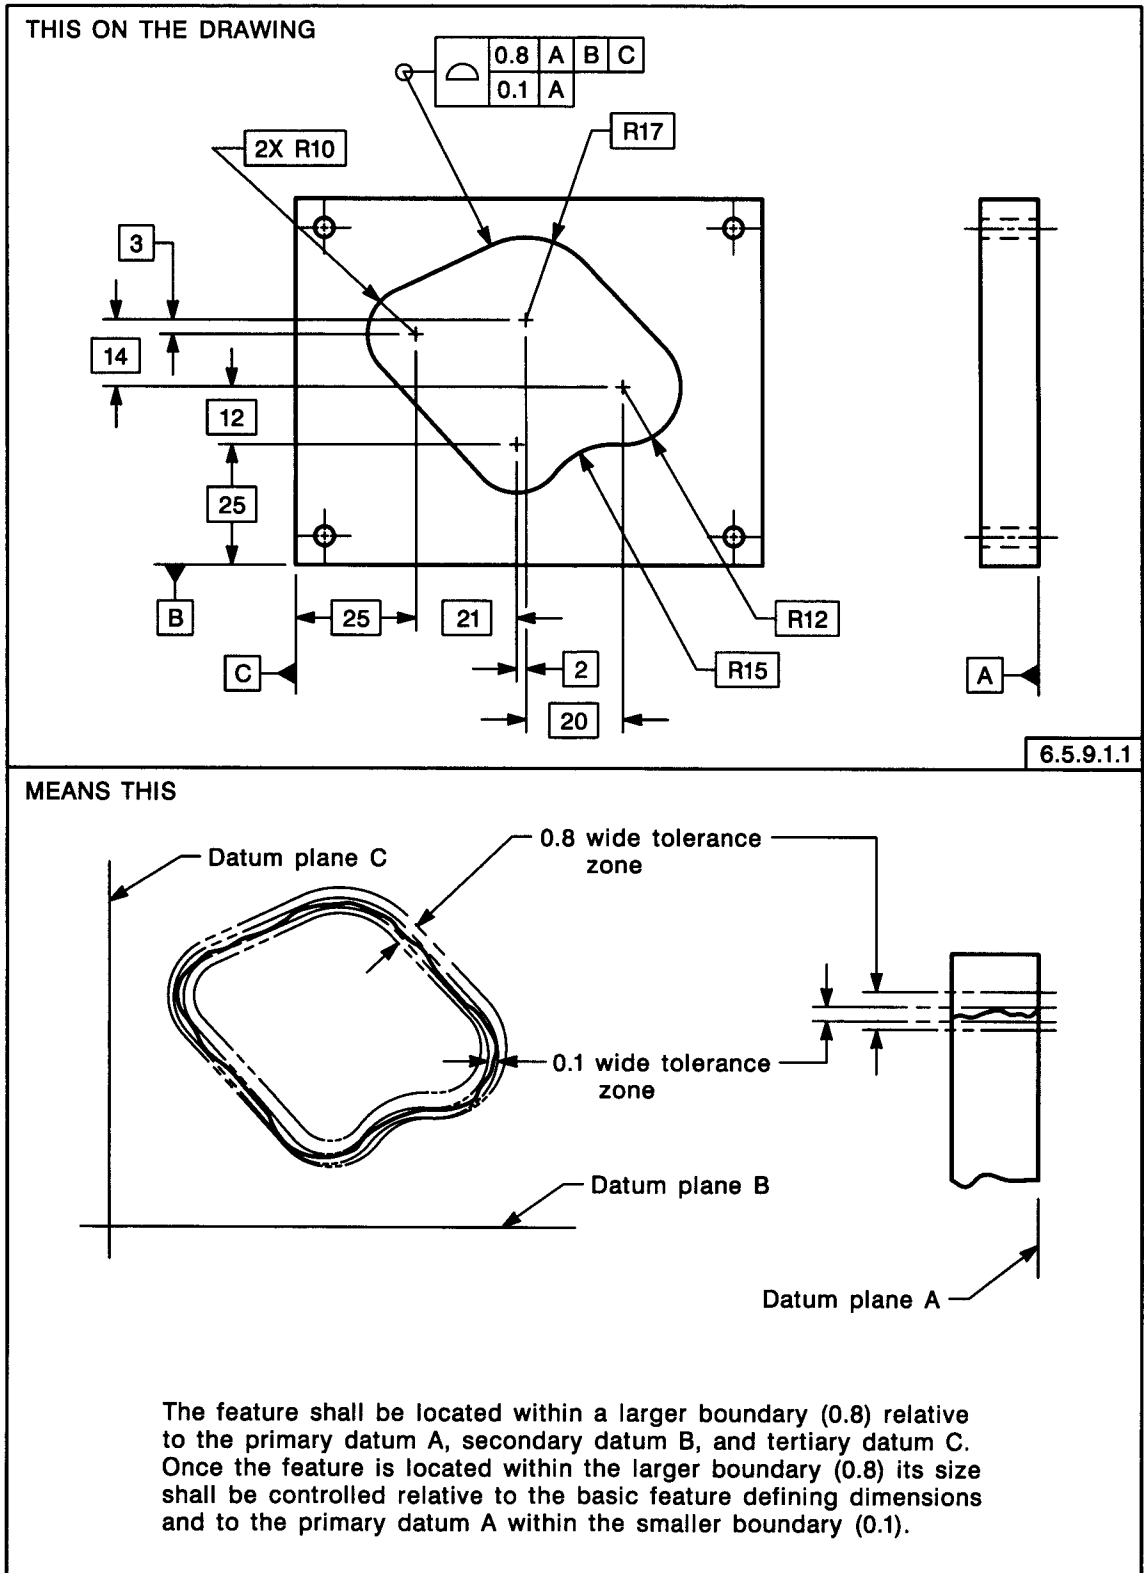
COMPOSITE PROFILE TOLERANCING OF AN IRREGULAR SURFACE
